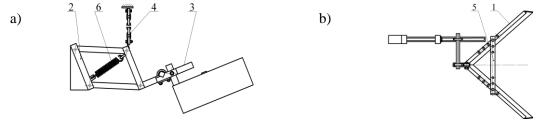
Distributor diagram: a – side view; b - top view; 1 – wing; 2 – parallelogram mechanism; 3 – beds; 4 – restrictive chain; 5 – adjusting bar; 6 – spring
